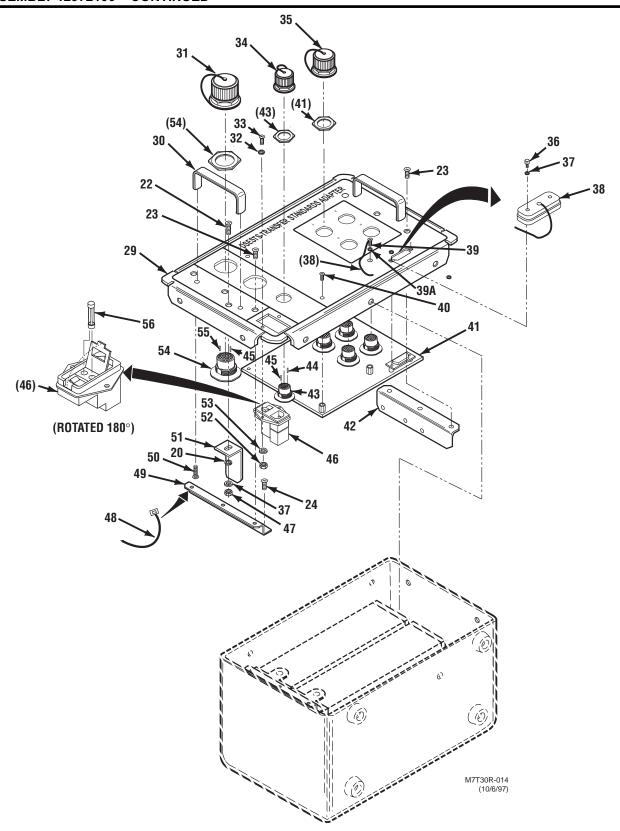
Group 96000302 Special Tools (Repair Parts) Transfer Standards Adapter Assembly 12972100 (Sheet 2 of 2)
